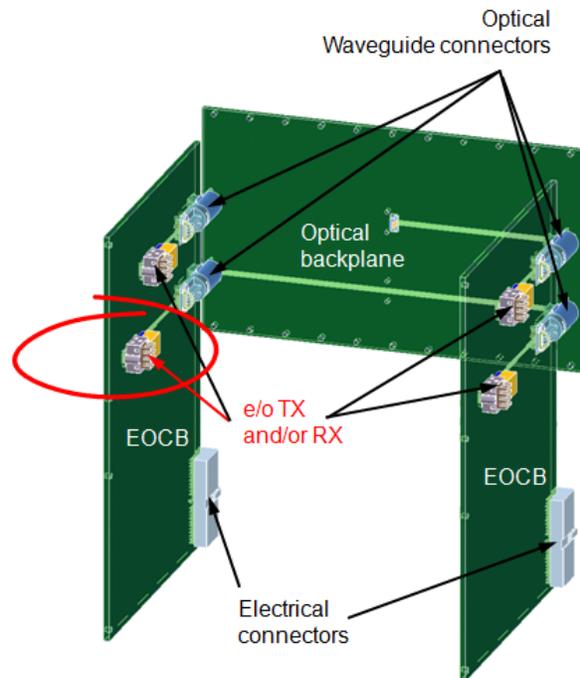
Schematic drawing of a demonstrator system with 2 modules per daughter card, and embedded glass double layer optical waveguides realized within the FutureBoard-Project [6] (drawing courtesy of R. Mödinger, ERNI electronics GmbH). The highlighted area depicts the focus of the paper at hand: Tx/Rx integration into large panel EOCB.
